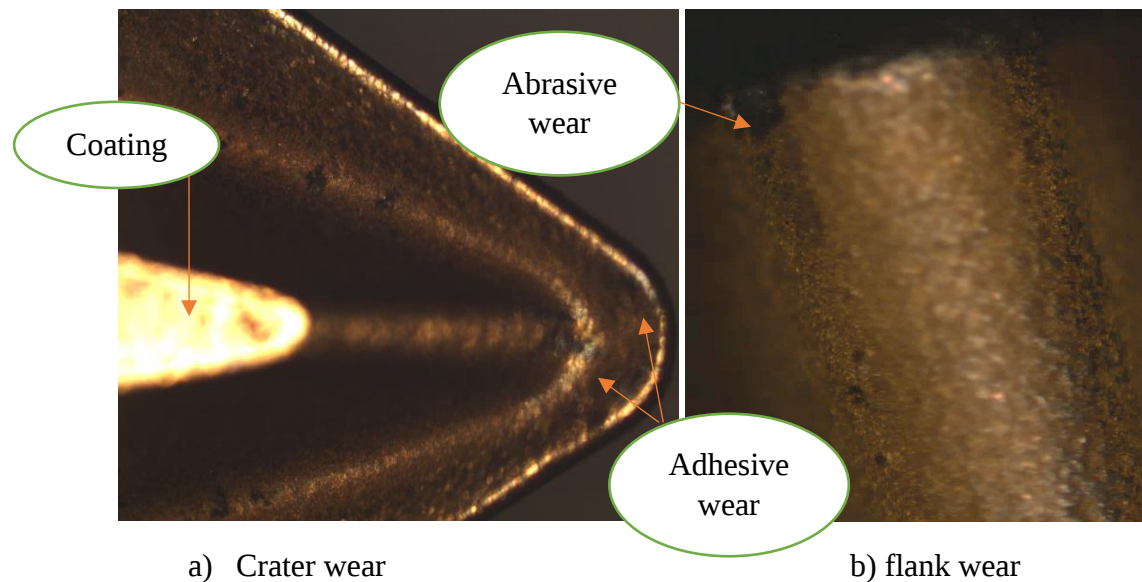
29 Crater and Flank Wear at 90 m/min, 0.5 mm, and 0.15 mm/rev of (Exp.1)
